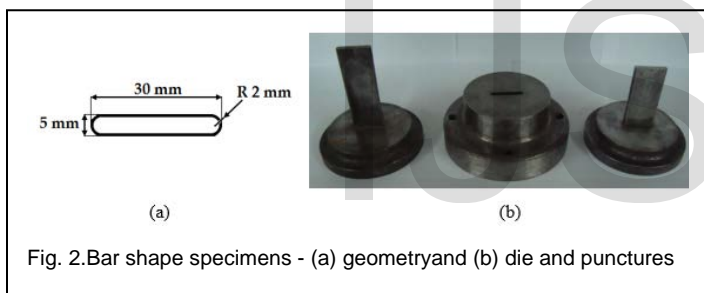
Bar shape specimens - (a) geometry and (b) die and punches
